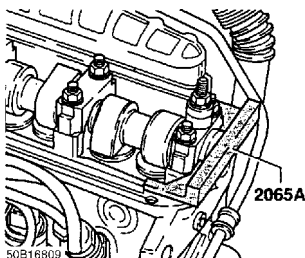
Aligning Camshaft Locking Bar (2065A)
